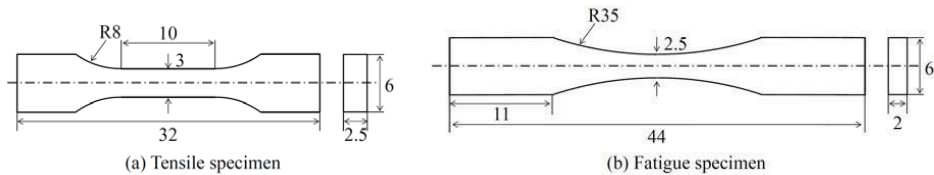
Geometry of (a) tensile and (b) fatigue specimens.
